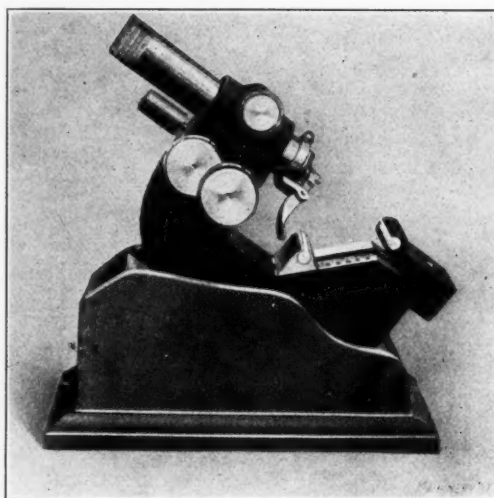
Minimeter mounted for Use on Cylindrical Surfaces
